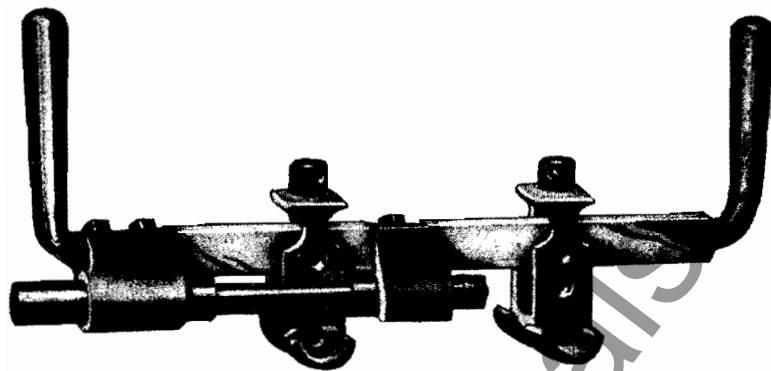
MOTOR OPERATED SLOTTING TOOL
